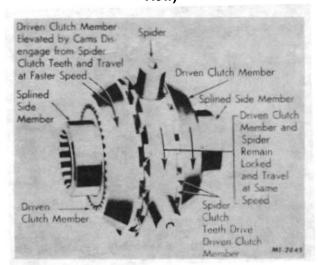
Right-Hand Turn—Rearward Direction Right- and Left-Hand Turns - Rearward Direction
